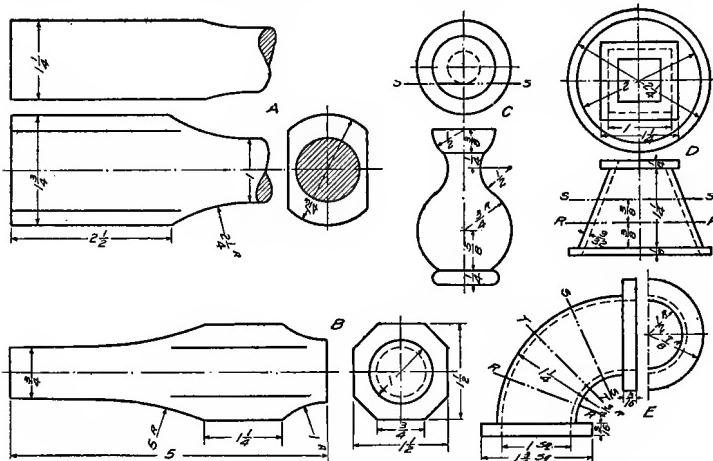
Intersection of surfaces and planes, Probs. 62 to 66.
